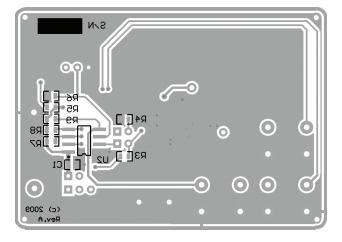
AAT1403 Evaluation Board Bottom Side Layout.
